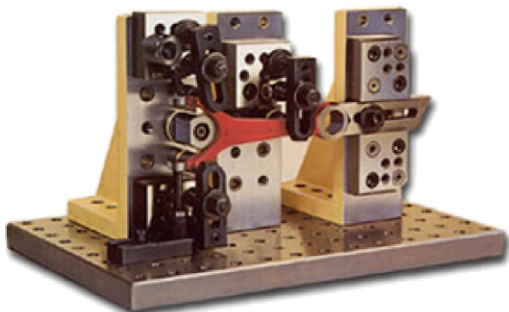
Modular fixture for a part for the construction machinery (BLUCO corp.) [30].
